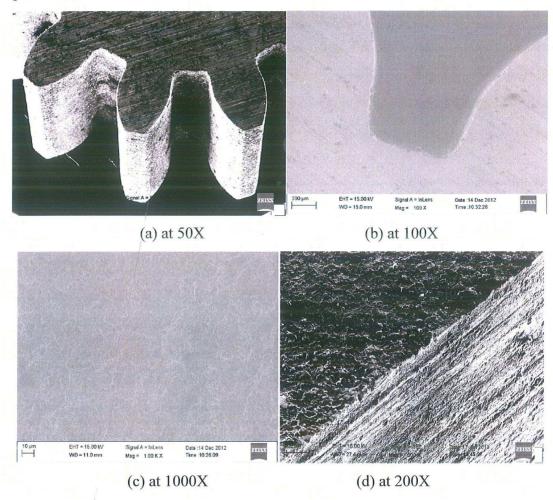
SEM images, (a) and (b) burr-free and uniform gear tooth profile; (c) smooth crack-free texture of the tooth surface of the best gear; (d) craters on tooth surface of miniature gear.
